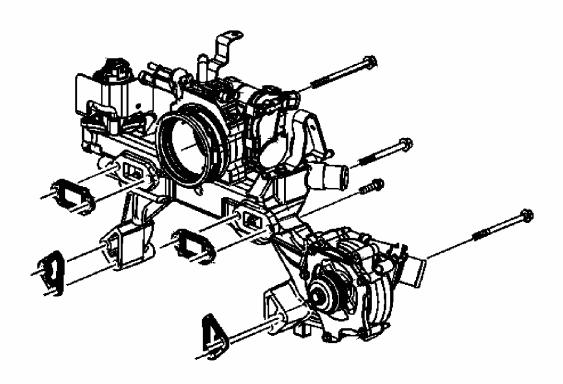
Removing/Installing Water Pump Housing Gaskets & Bolts Courtesy of GENERAL MOTORS CORP.
